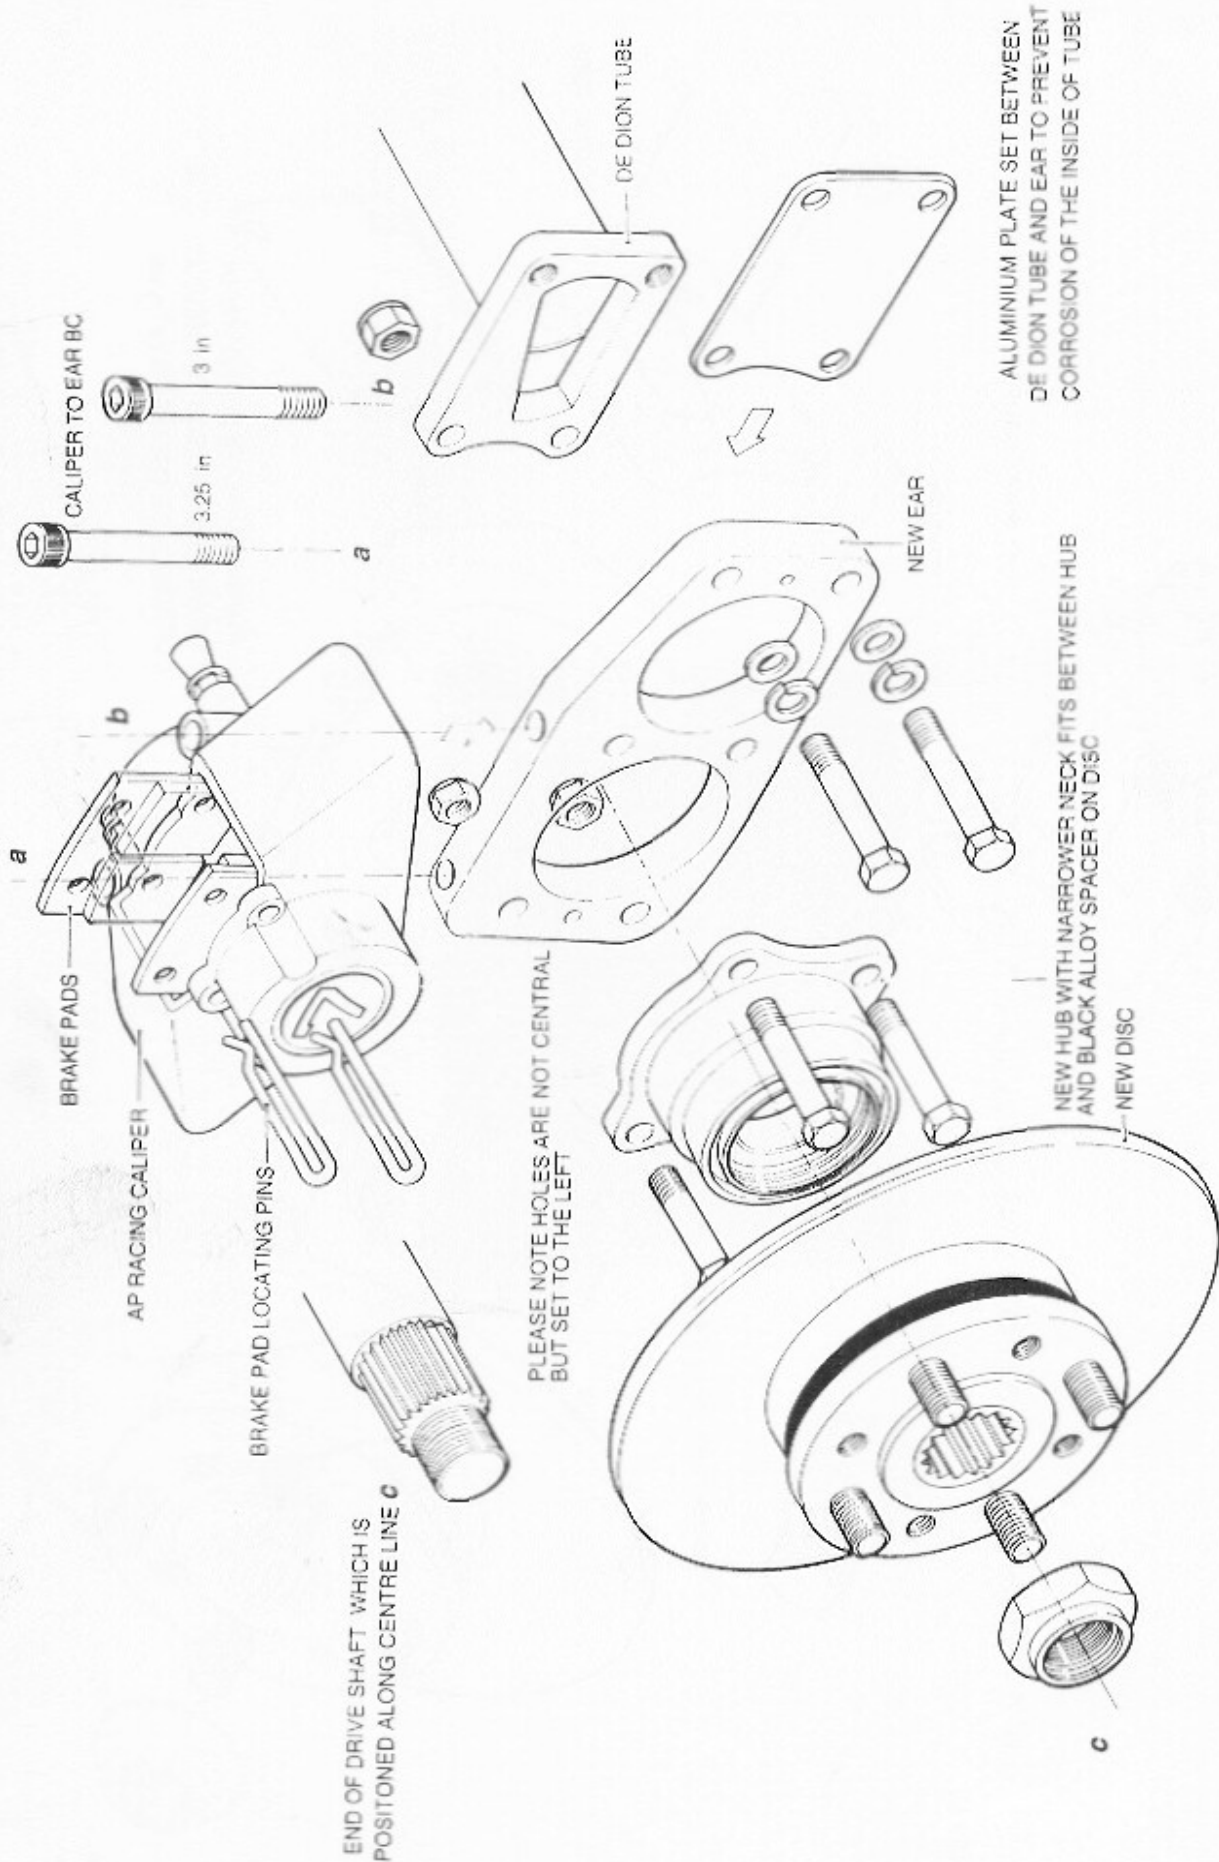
A Rear Hub and Brake Assembly (Standard Brakes)
